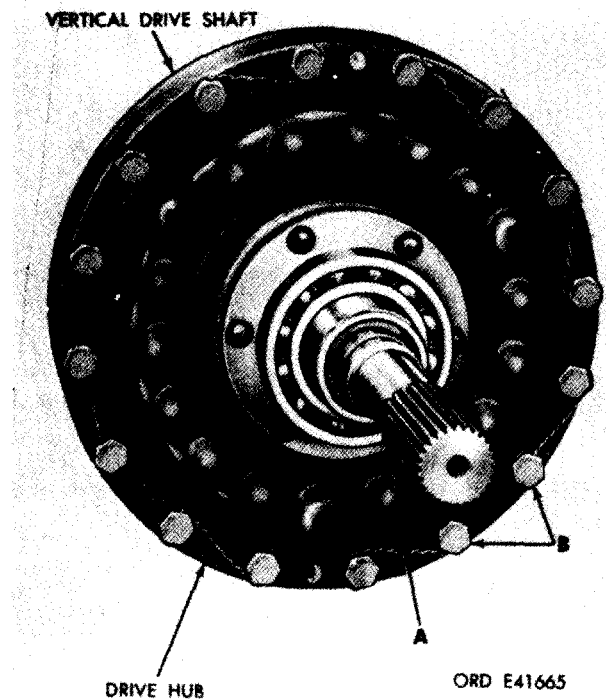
Removing or installing fan drive housing cover preformed packing.
